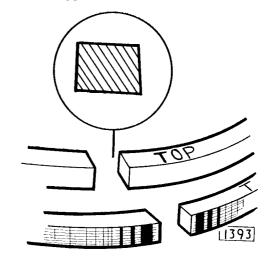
Showing the identification marks on tapered periphery compression rings.
